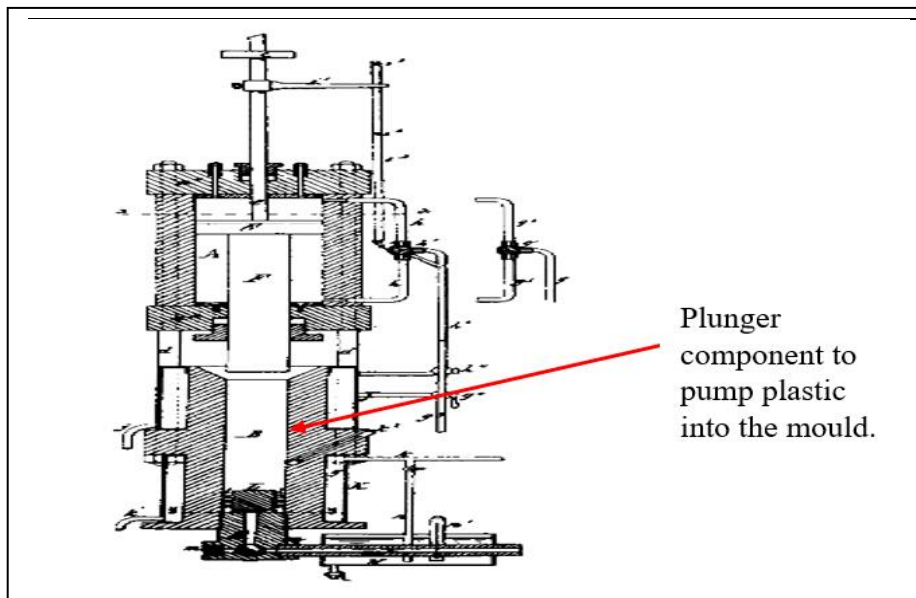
John Hyatt's 1st patent drawing of the injection moulding machine
